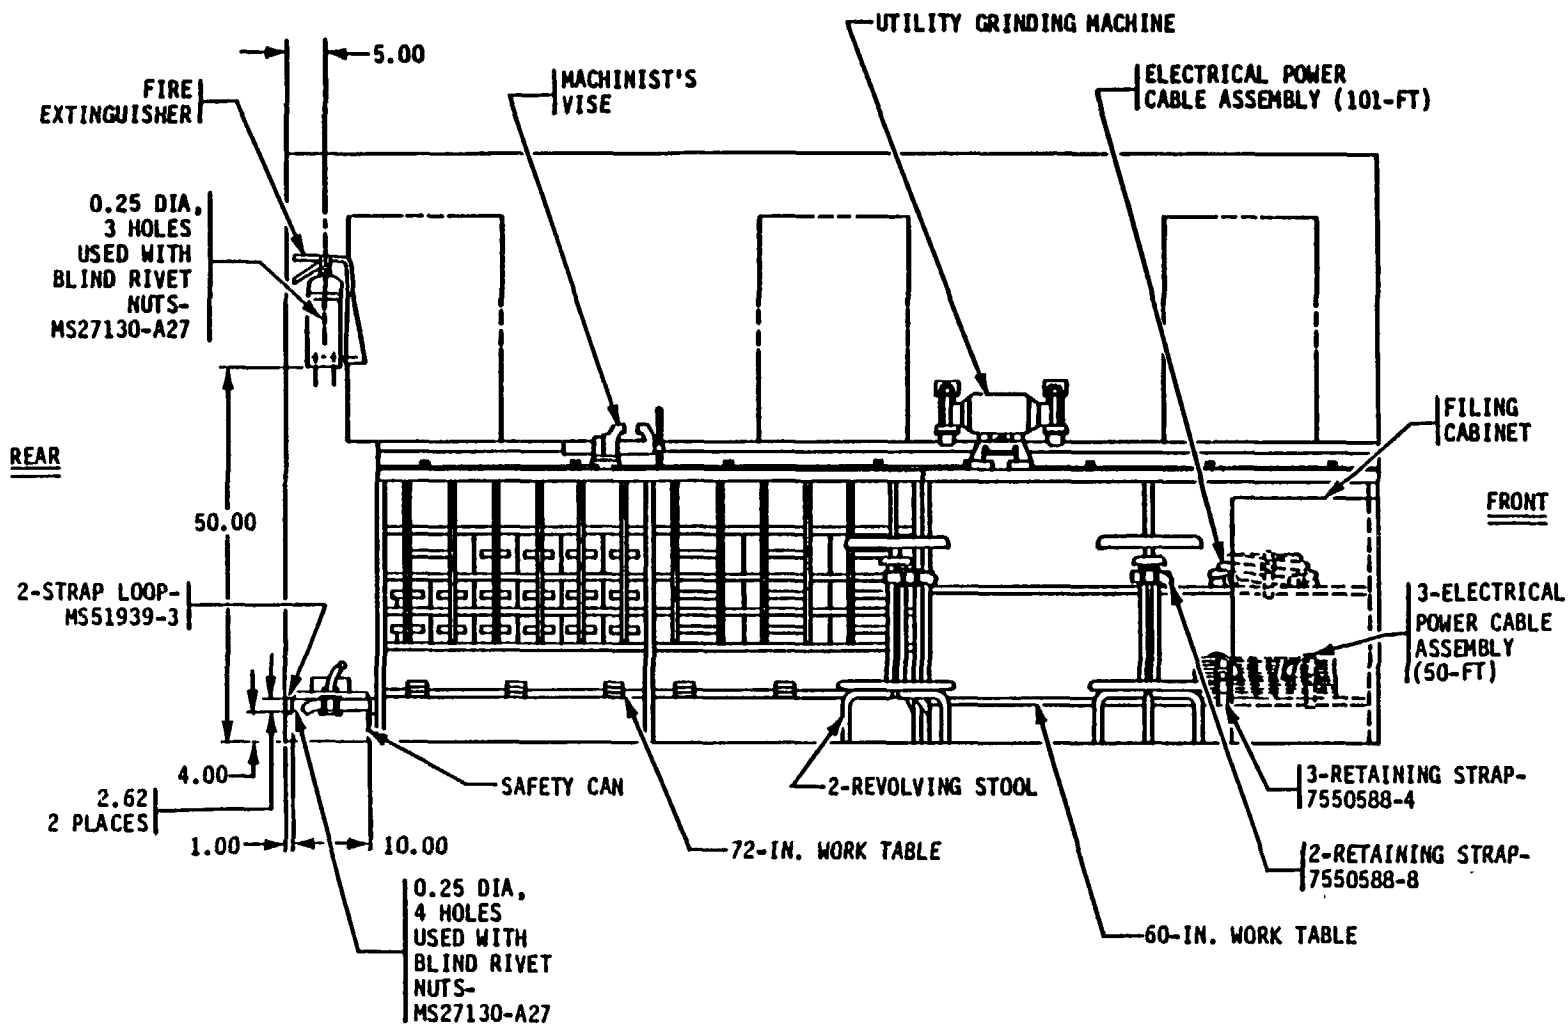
Components to be Mounted, M109A3, Left Side Elevation.
